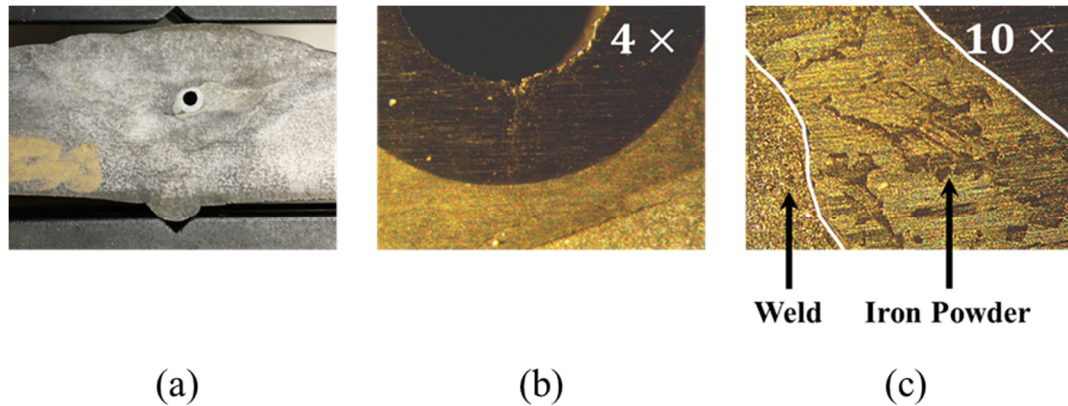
Destructive examination of welded sample with embedded tungsten tube including (a) macrographic and (b), (c) microscopic investigations [145]
